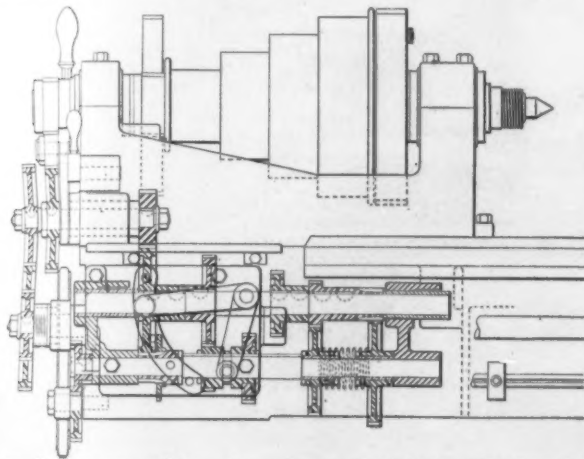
Sectional Elevation of the Headstock, Showing the Independent Geared Feed Mechanism.
